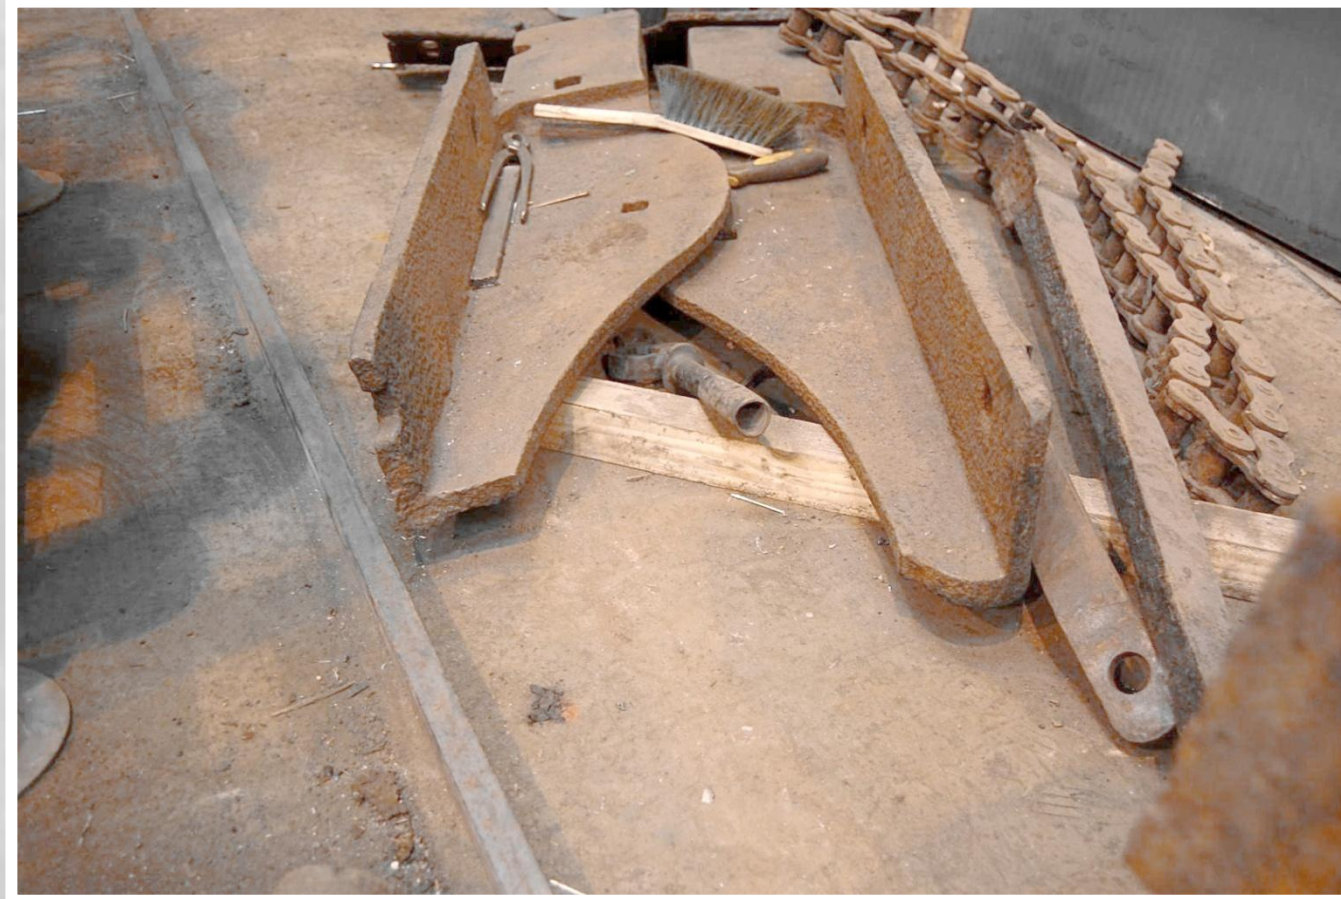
11/05/2010 Connection Rod upper housing plates (separated from sides of Rocker Beams). Loss of fabric where fractured around bolt hole.
